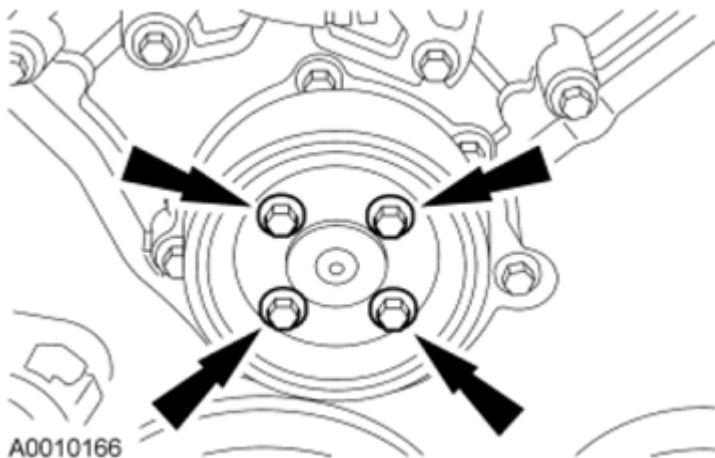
Locating Coolant Pump Pulley Mounting Bolts
